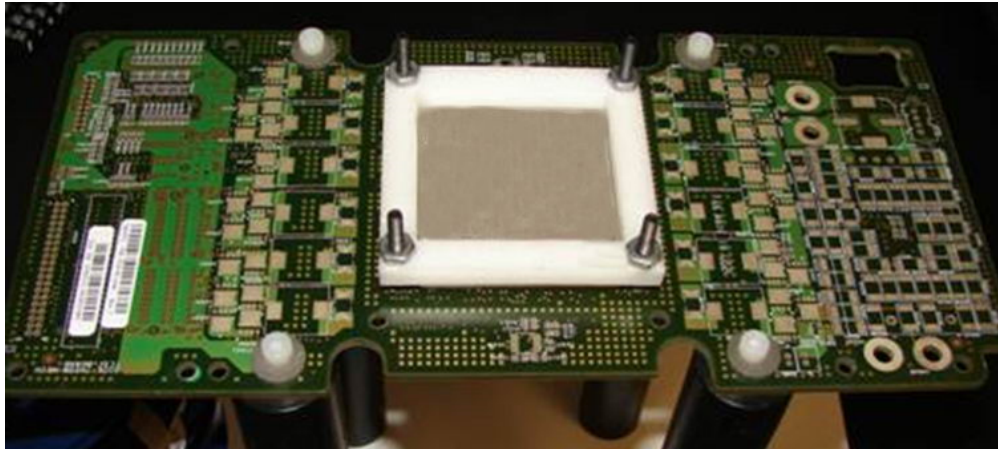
Clamping Fixture for CLGA (Lid Attachment Step)
